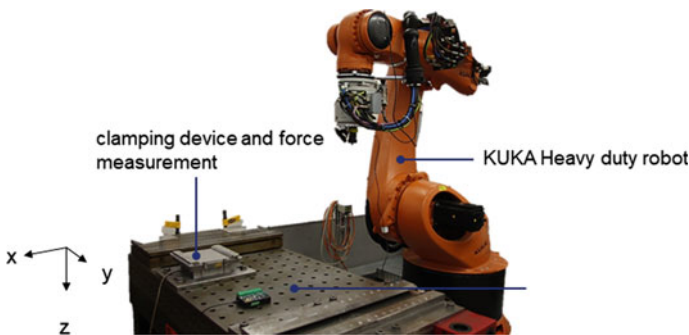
Robotized FSW setup, clamping device with force measurement unit, and welding table
